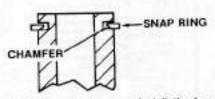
View showing proper installetie of snap ring retaining drive gear in housing. Refer to peragraph 159.
